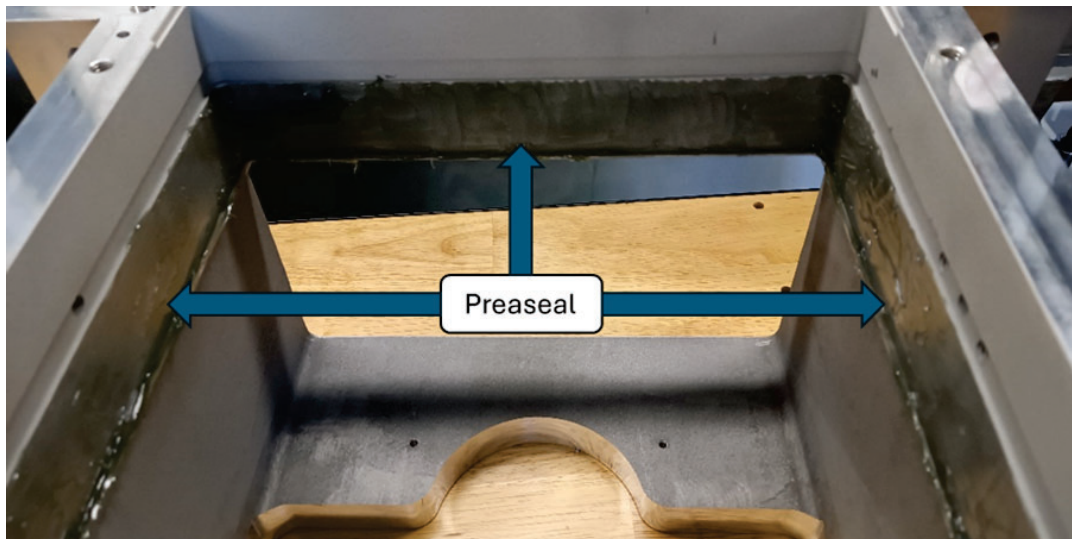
The preasealant is applied to machine chamber and the stator to prevent the injected vacuum sealant from leaking out through the gaps between the machine chamber and the stator. These gaps are necessary to ensure any stator can be mounted into any machine chamber, but they must be sealed to ensure the vacuum seal can completely fill its sealing groove.
